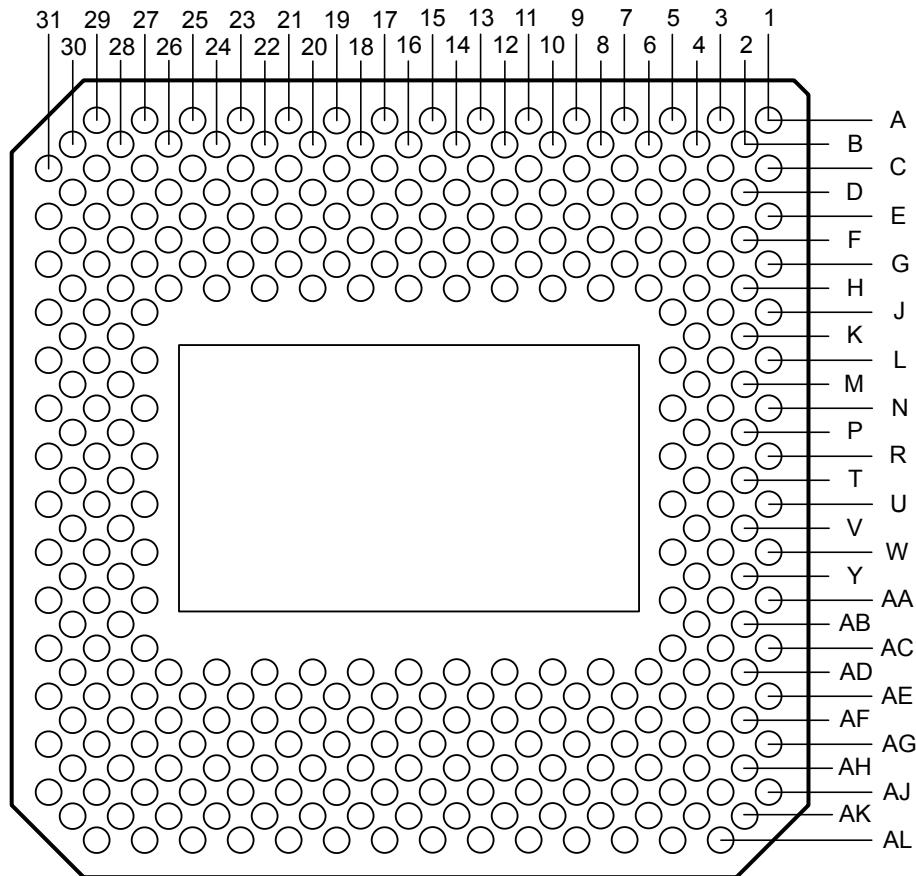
FLV Package 321-Pin LGA Bottom View
